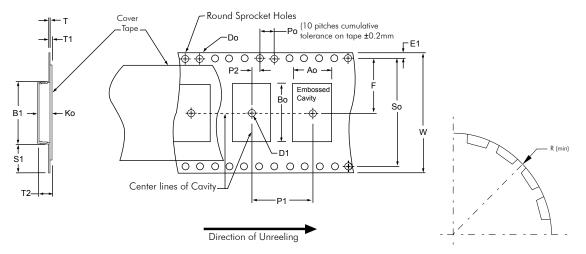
Standard Embossed Carrier Tape Dimensions
